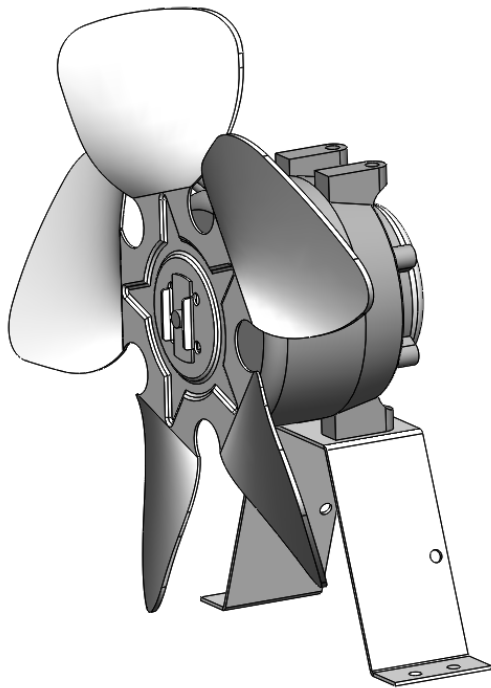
B.9.1d C-Frame (Saded Pole) Fan Motor
